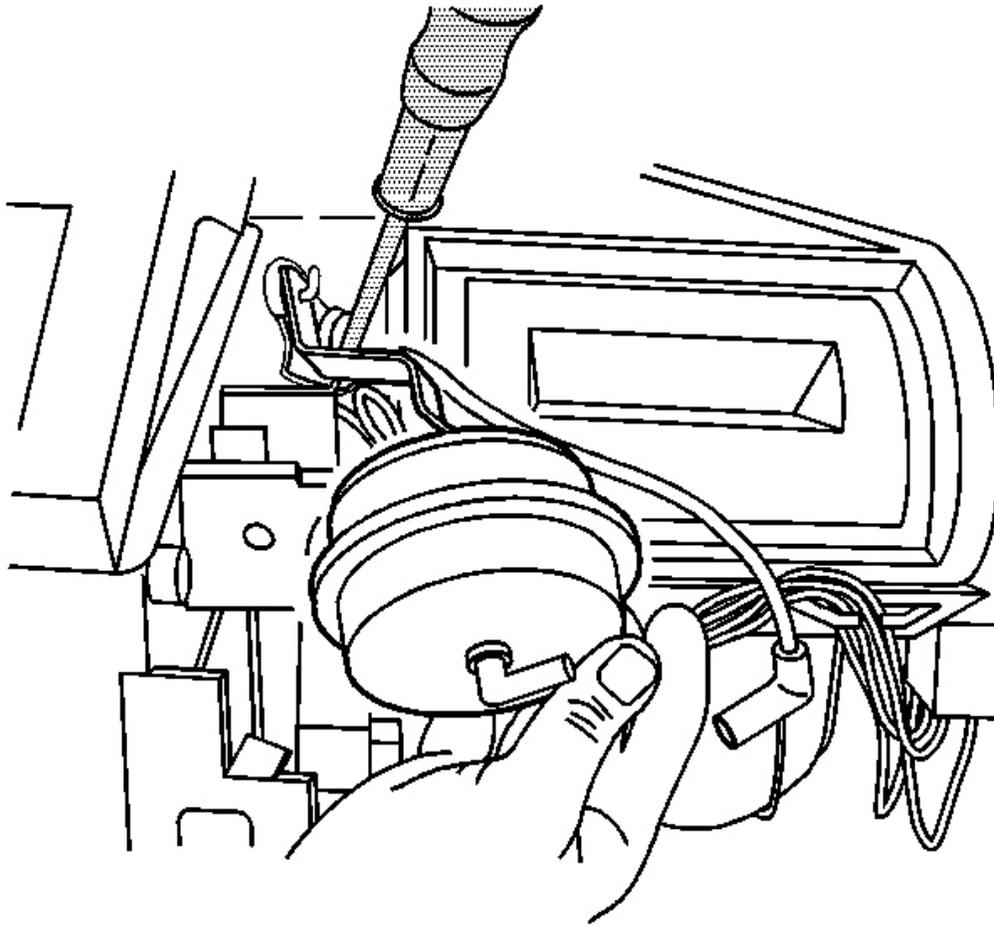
Passenger SIR Bracket & Defroster Actuator
